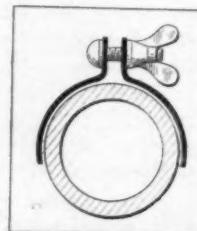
Showing the winged nut on a clamp joint. This is a handy means of connecting the radiator and tubing.
